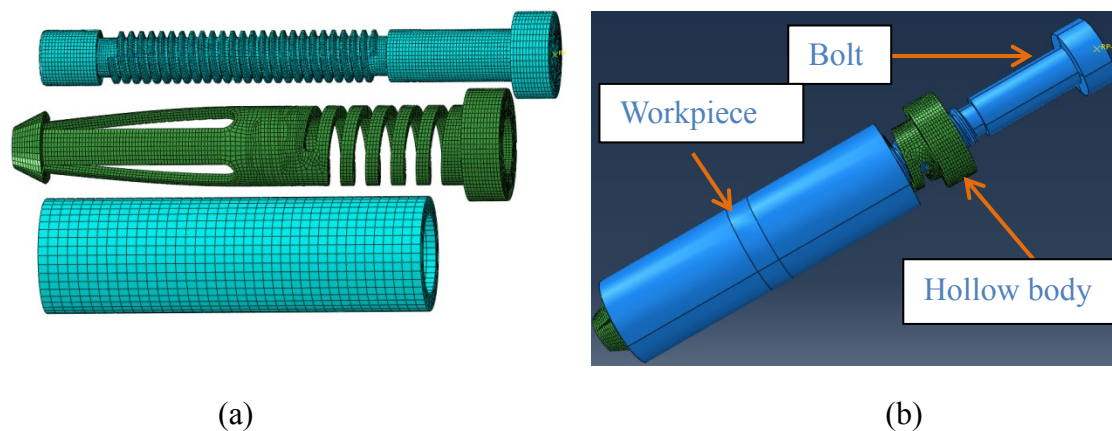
FEA of torque vs. clamping load: (a) Mesh of the temporary fastener and workpiece and (b) FEA assembly
